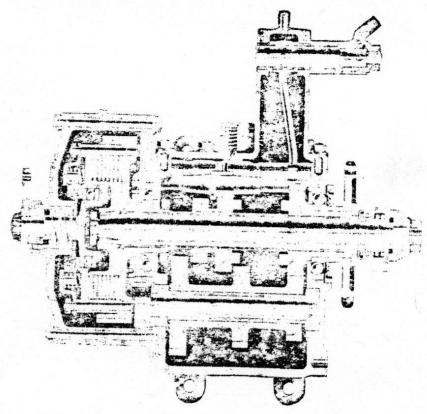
Cross Section of Transmission and Clutch Showing Assembly of Component Parts
